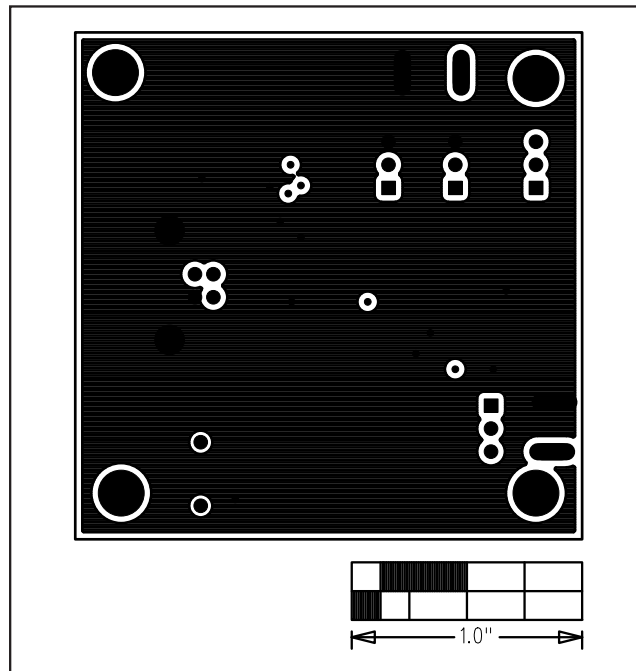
MAX14508E EV Kit PCB Layout—Inner Layer 2
